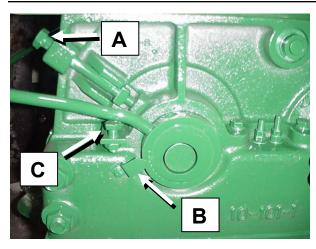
Rollermill Housing Eccentric Bearing. A - Eccentric Lock Bolts, B - Pointer Gauge, C - Stop Bolts.
